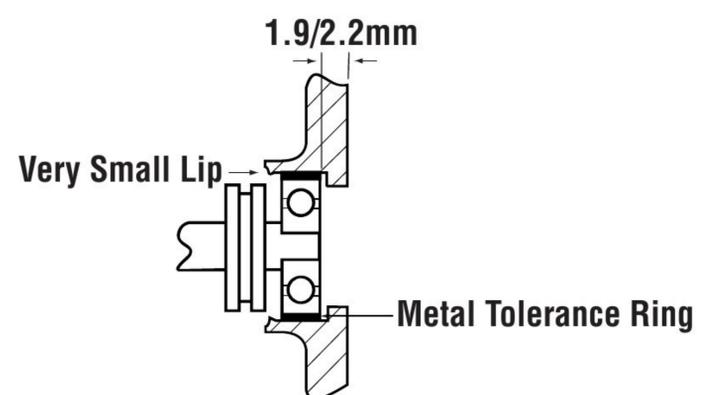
Early Delco alternators use metal tolerance rings as a brake. These tolerance rings and early-style plastic tolerance rings both must be recessed.
